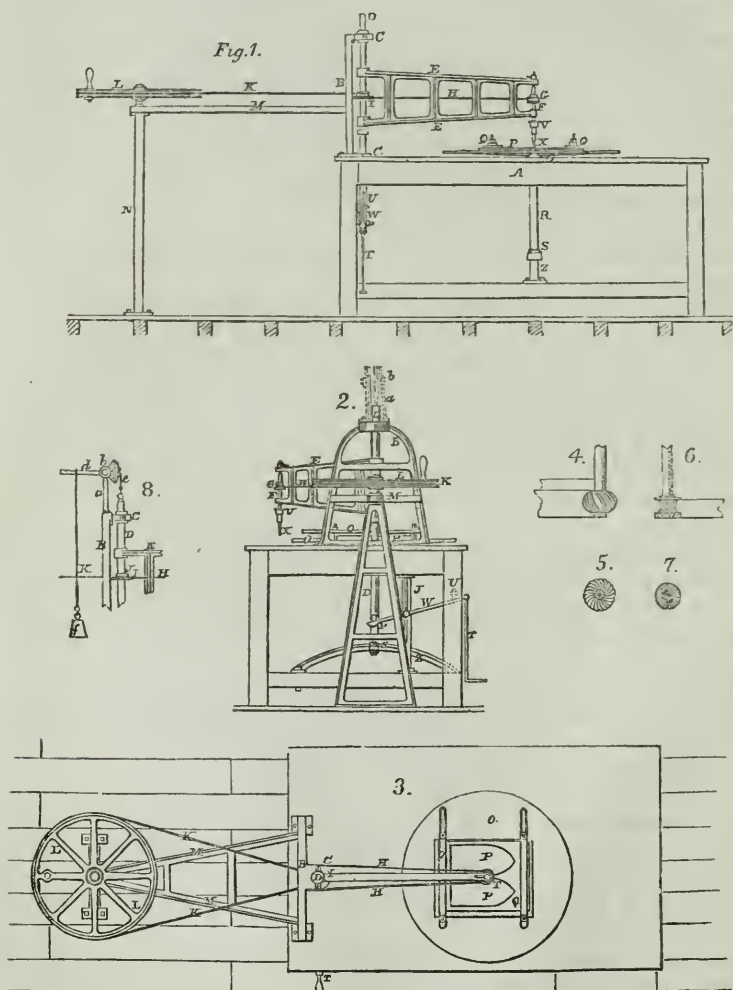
represents a side elevation; fig. 2, an end elevation; and fig. 3, a horizontal view of the machinery. *A A*, is a bench, or table, for supporting the several parts of the machine; *B, B*, is a standard, or bracket-frame, firmly fixed to the said bench; which frame is provided with plummer-blocks and bearings *c, c*, to receive a spindle *D*. *E*, is a forked frame, or swinging arm, firmly fixed upon the spindle *D*; and the other end of the arm *E*, is furnished with suitable bearings, which carry, in a vertical position, a spindle *F*. The lower end of this spindle *F*, is formed to receive a chuck *V*, or other suitable contrivance, for attaching and holding securely, the tool, drill, or cutter *x*, or such other cutter as may be required; and upon the spindle *F*, near its upper end, is fixed a conical pulley *G*, having grooves of different diameters, for the purpose of determining the velocity with which the spindle shall be made to revolve. This pulley is designed to receive an endless band or cord *H*, which passes round the lower part of a similar pulley *I*, running loosely upon the spindle *D*; the upper groove of the pulley *I*, is made to receive another endless band or cord *K*, that passes around a wheel or drum *L*, supported by a standard or frame *N*, which is connected, by a similar frame *M*, to the standard *B*; but the band *K*, may be driven by any other means. *O*, is a horizontal movable table, mounted upon a vertical shaft, *R*, which passes through the bench *A*; its lower end being supported by, and turning freely upon, a step or bearing *S*, in the arch *Z*, fixed to the framing of the bench. The tablet or slab of wood, or other material, intended to be wrought by the cutter *x*, is to be placed upon the turning-table, as at *P*, and made fast thereon by screwed clamps. At the left-hand end of the bench *A*, there is a vertical bar *J*, made fast to the wood framing, in which there is a fulcrum-pin for the lever *W*, to turn upon; one end of this lever *W*, is formed into a concave socket to receive, as a step, the lower end of the spindle, *D*. before mentioned; and the other end of the lever is connected, by a joint, with a treadle-rod *T*. This treadle-rod and lever are for the purpose of raising, when required, the spindle *D*, with the forked frame *E*, carrying the drill. *U*, is an adjustable screw, set in the leg of the bench, as a stop to the lever intended to regulate the descent of the spindle *D*, with the frame *E*, in order that the cutter *x*, shall not penetrate deeper into the material, or substance *P*, than may be desired.
